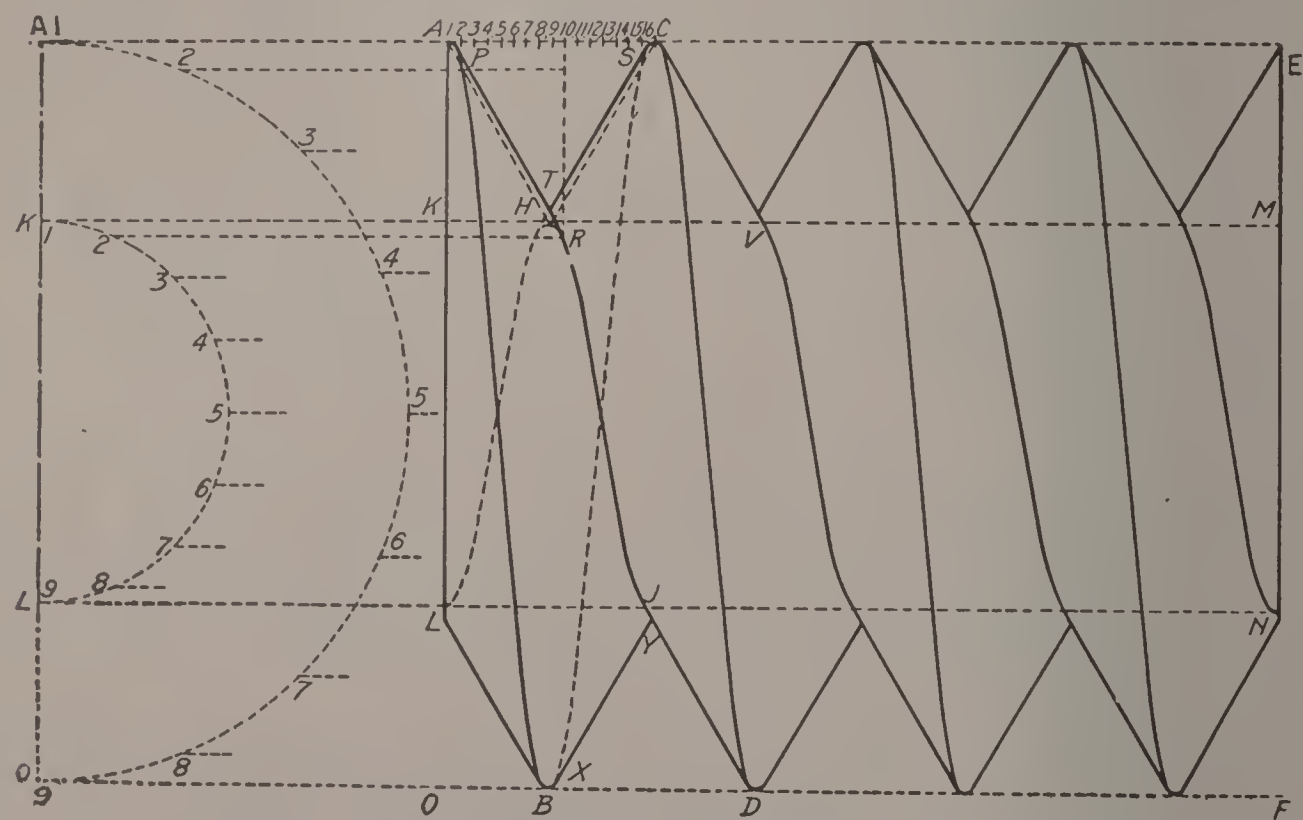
Accurate Projections of the Right-Hand V Screw Thread
